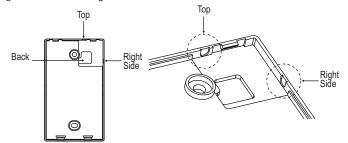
Attaching the Wall Figure 206: Installing / Removing Plate. the Controller. Installing the Controller
